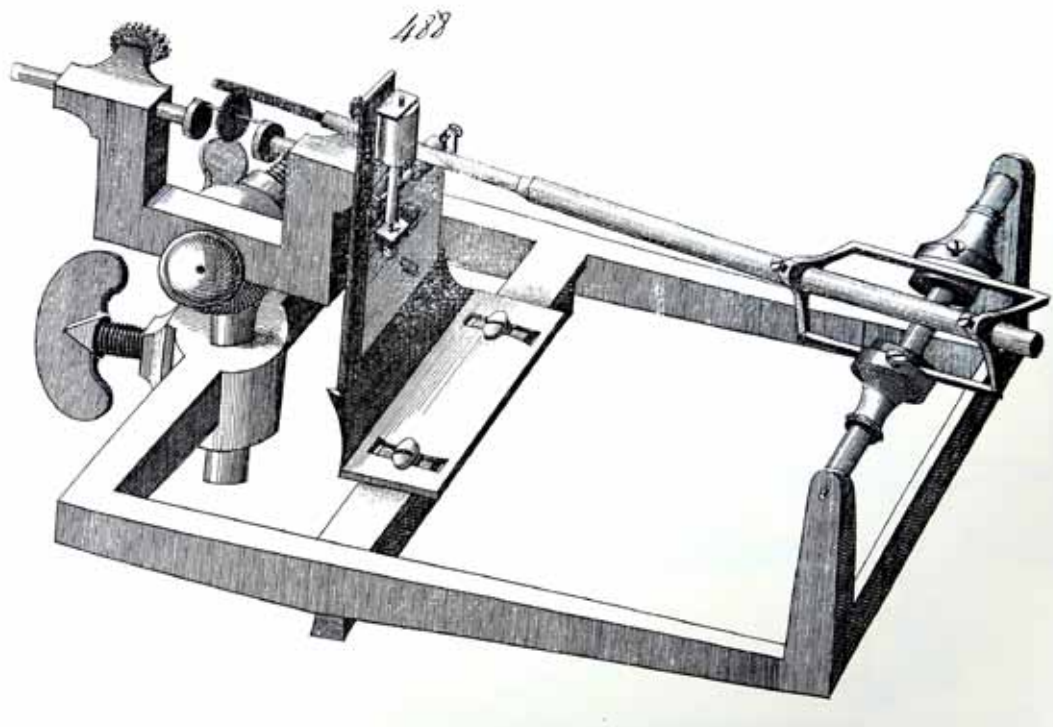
A finishing machine from John Wyke's tool catalogue, plate 59, the plate probably engraved 1770.
